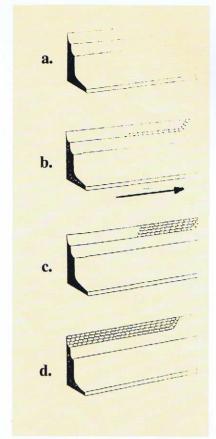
Bead sequence. The arrow shows welding direction.
